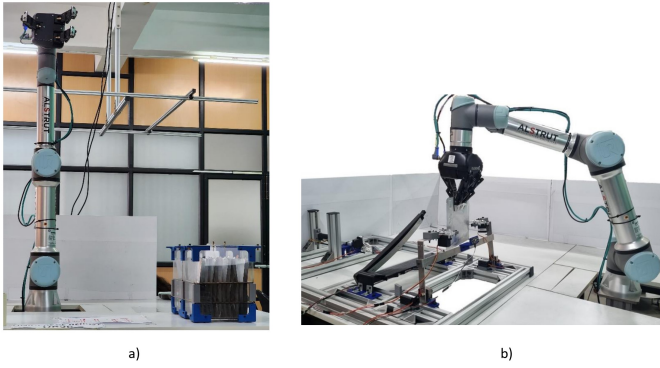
Robotic manipulator used for disassembly a) Start configuration with battery, b) Pouch cell delivered to disassembly mechanism
